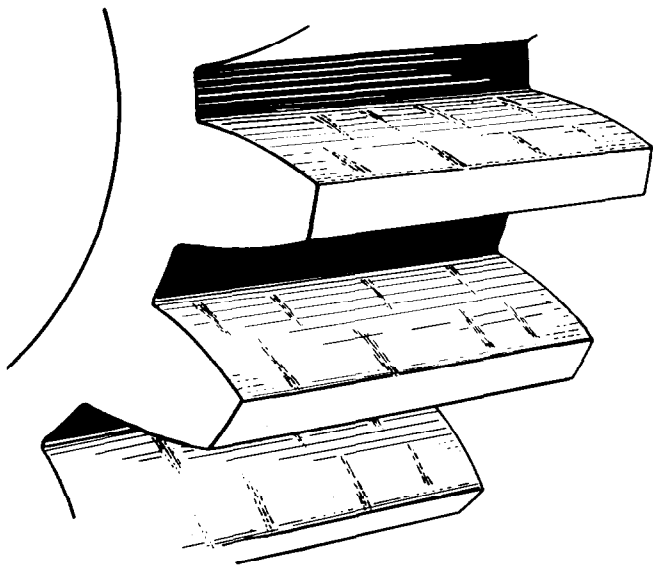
Scratching*. When sharp projections on the surfaces of gear teeth pierce the oil film, they gouge or score the surface of the mating teeth. Rough finish, pitted surfaces, or misalignment may be the cause.
